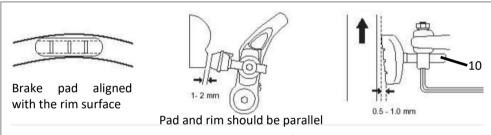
Right: large arrow shows direction of rim rotation. Brakes should be "toed-in" so the rear portion of each brake pad is about 0.5-1mm farther from the rim than the front portion of the brake pad
